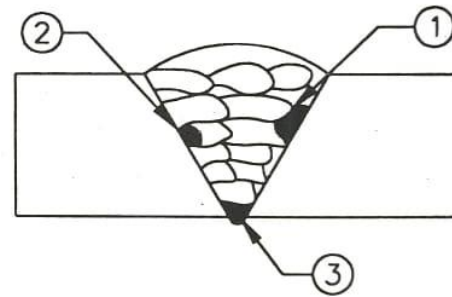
Result of inadequate fusion at different locations in a weld.
